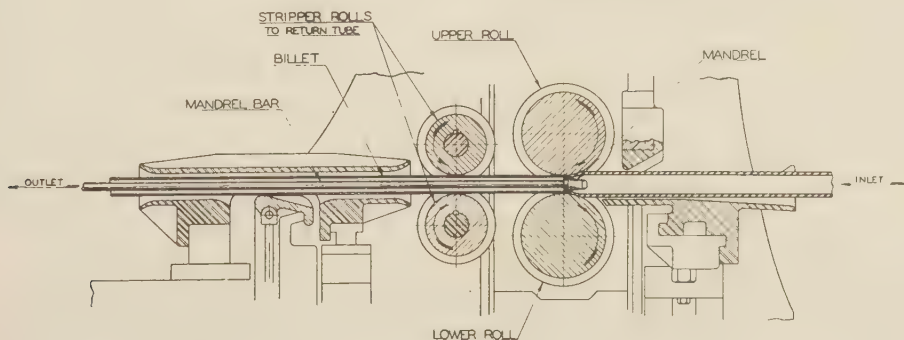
BILLET PASSING THROUGH ROLLING MILL OF STANDARD SINGLE-STAND TYPE
